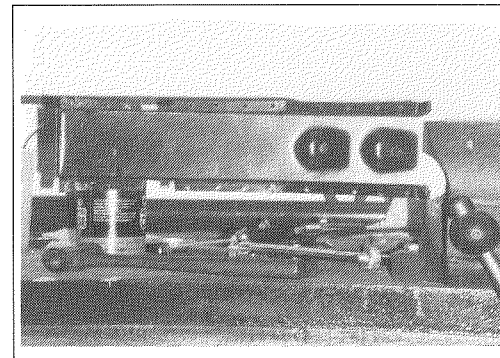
The prepared box ready for welding. Pre-punched holes for plug-welding plus adjustments at rear for fit at inner sill (all right angle folds).
